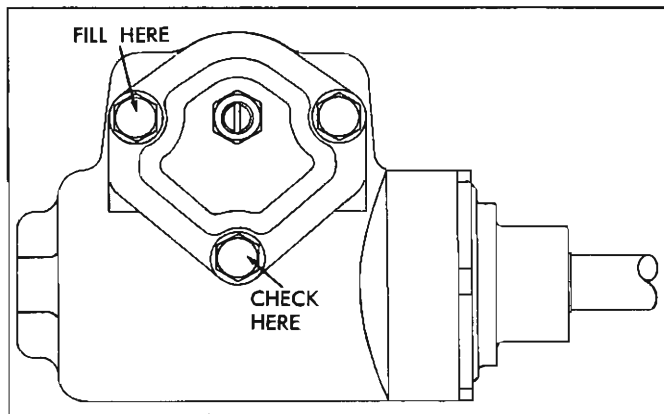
Side Cover Attaching Bolts—Chevy II Shown
